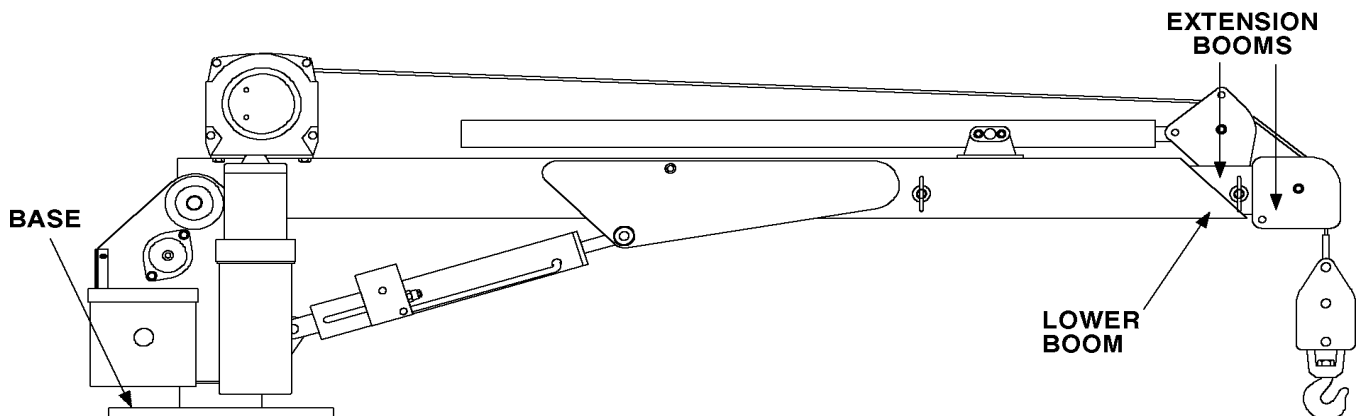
WELDMENT PART NUMBER LOCATIONS
